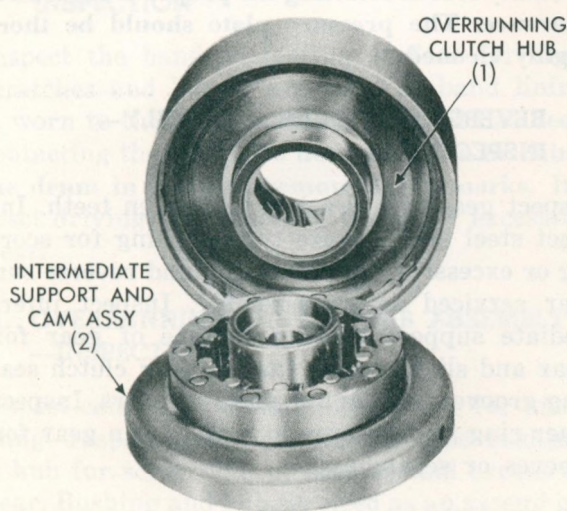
Removal and Installation of Intermediate Support and Cam Assembly from Overrunning Clutch Hub
